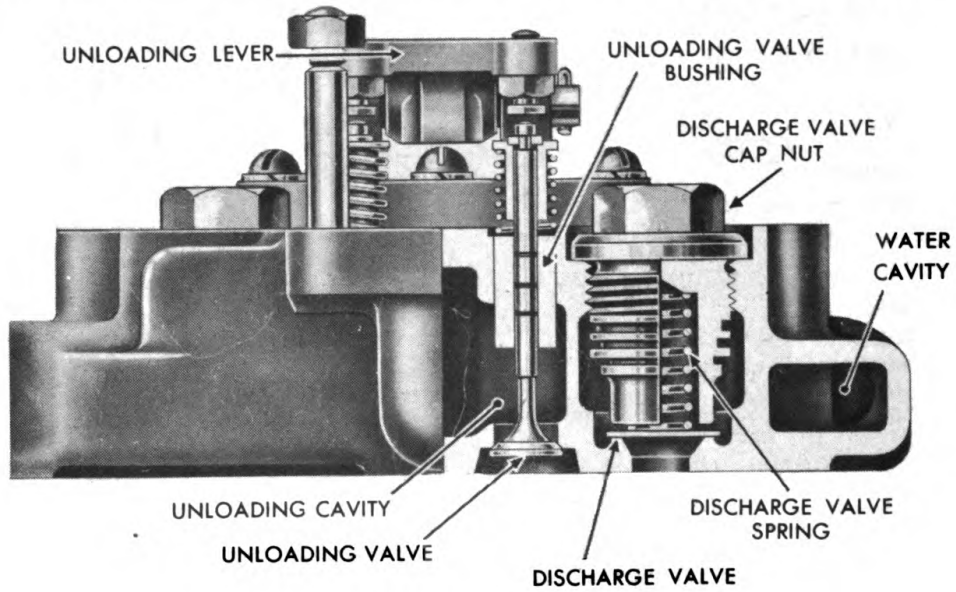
Sectional View of a Two-cylinder Water-cooled Compressor Cylinder Head
